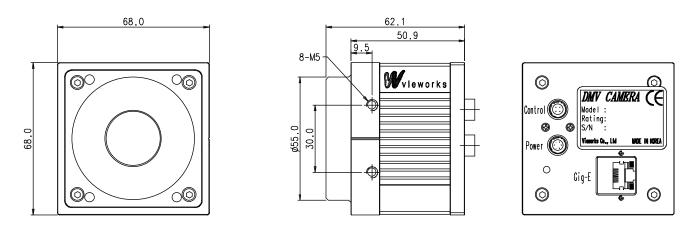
VH-5MG Mechanical Dimension (C-Mount)
